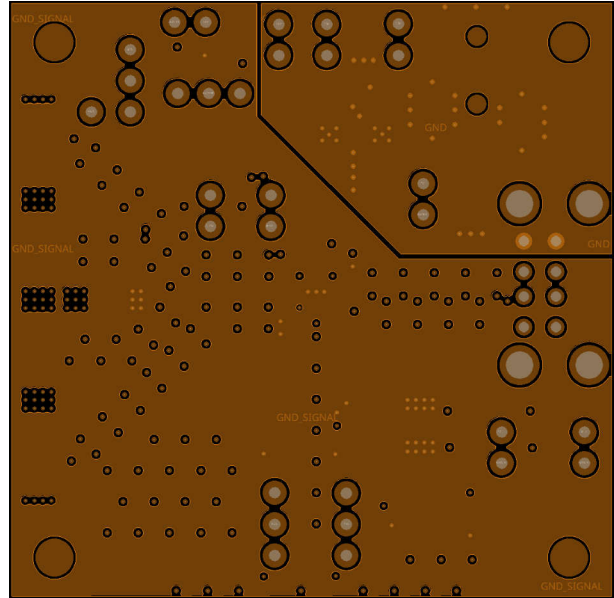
TUSB2E221QFNEVM PCB Layer 2 (Ground Plane)
